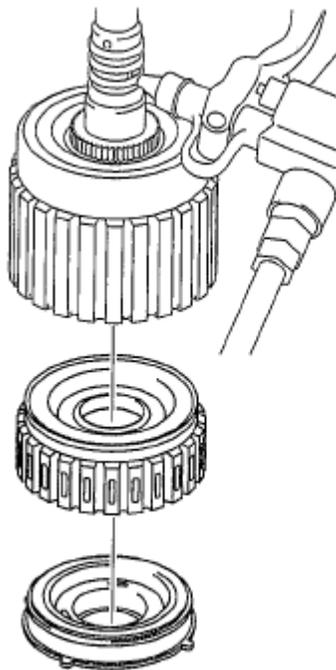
Identifying C4 Clutch Seal Plate And Piston Return Spring
